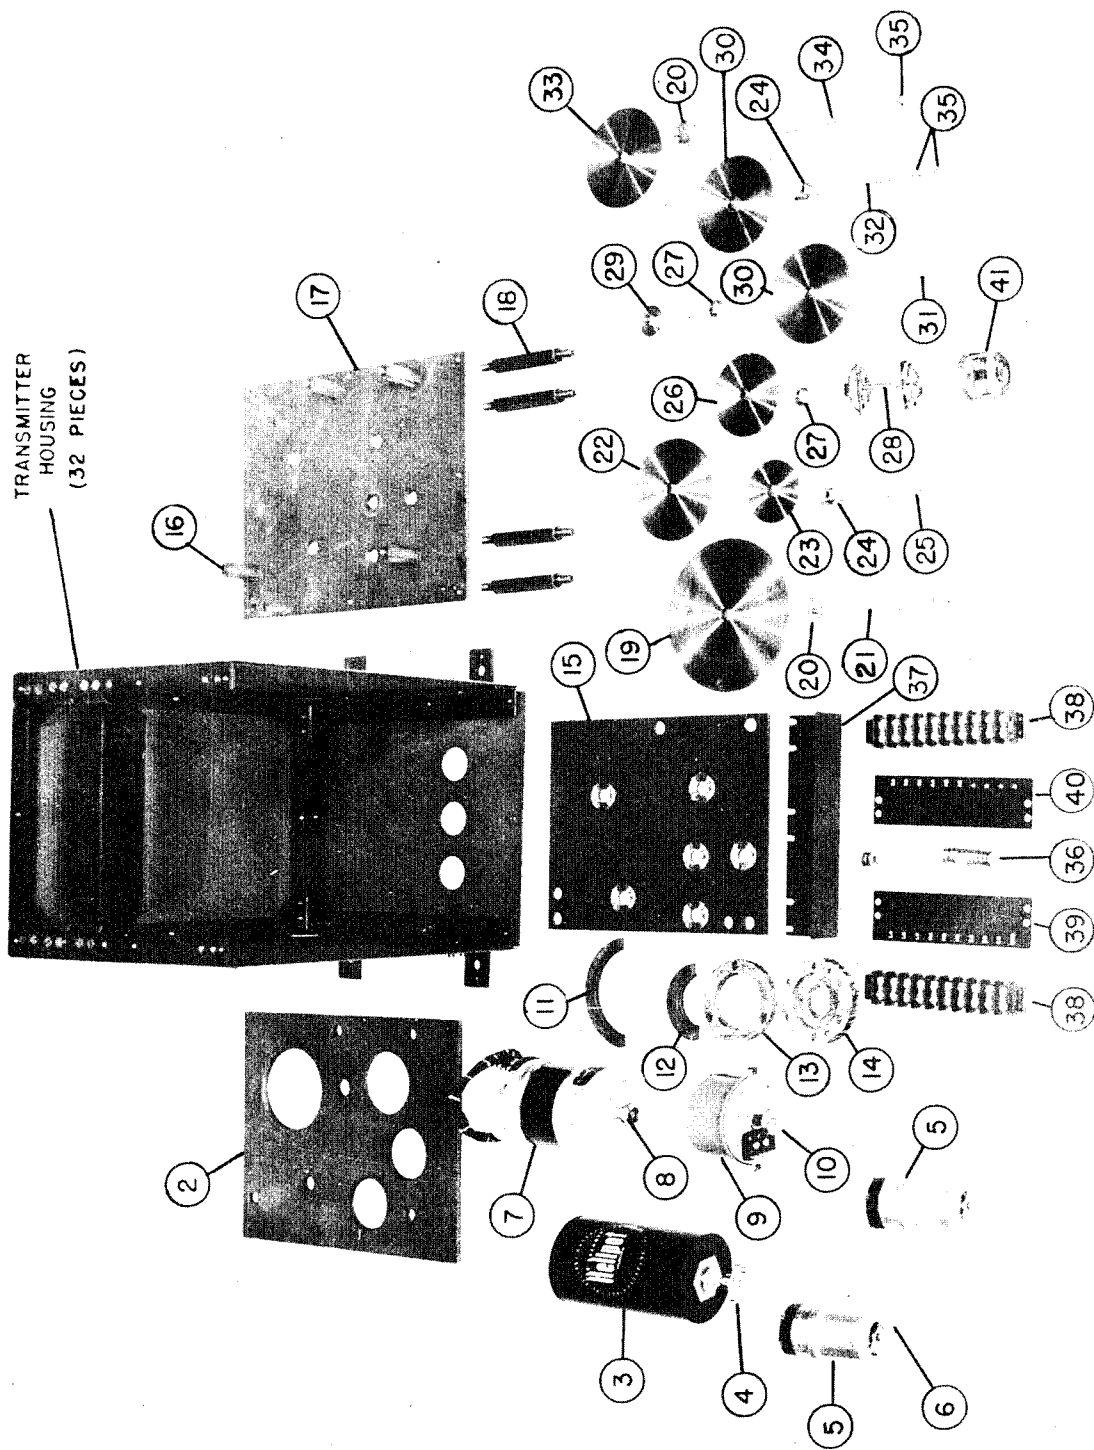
REGULATING-ROD POSITION TRANSMITTER - ROD NO. 15 DISASSEMBLED
